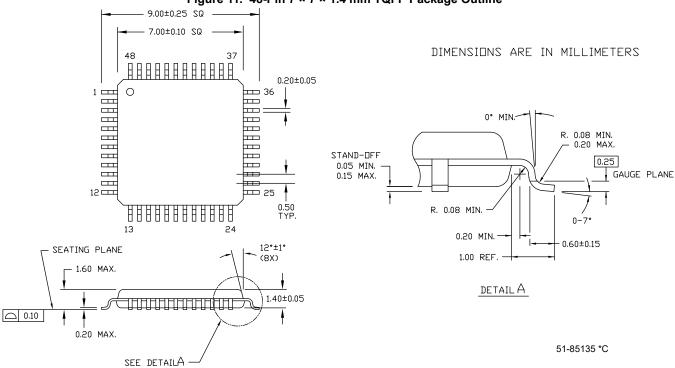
48-Pin 7 × 7 × 1.4 mm TQFP Package Outline
